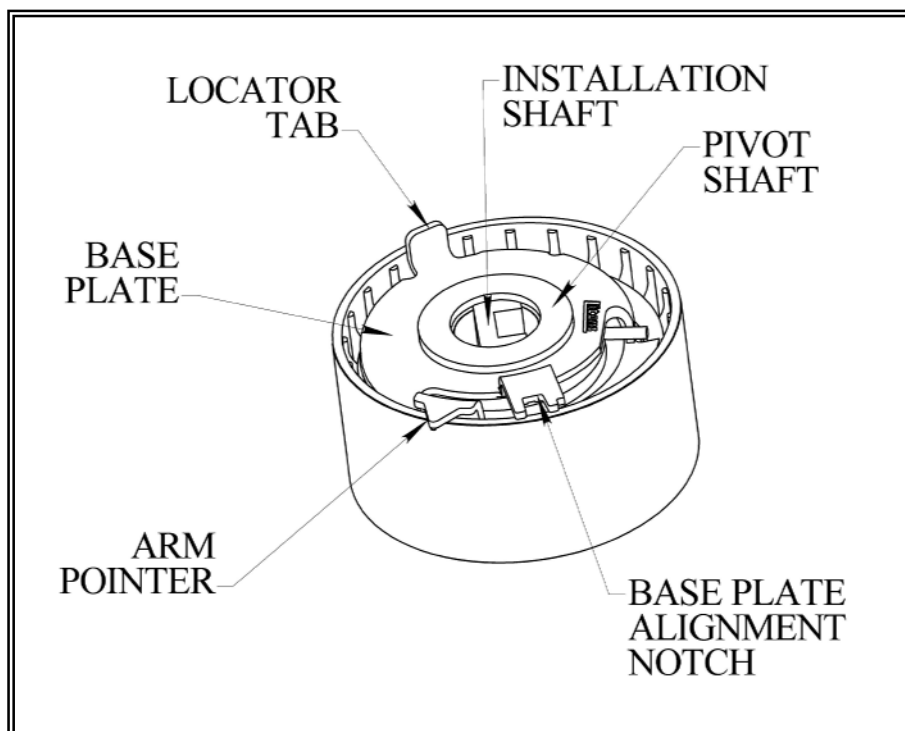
Back view of the (TBT) Timing Belt Tensioner
